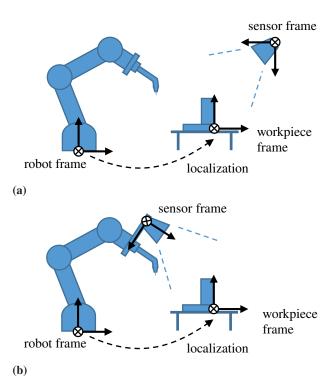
Workpiece localization for robotic welding with sensor system mounted externally (a) and on the robot end effector (b)
